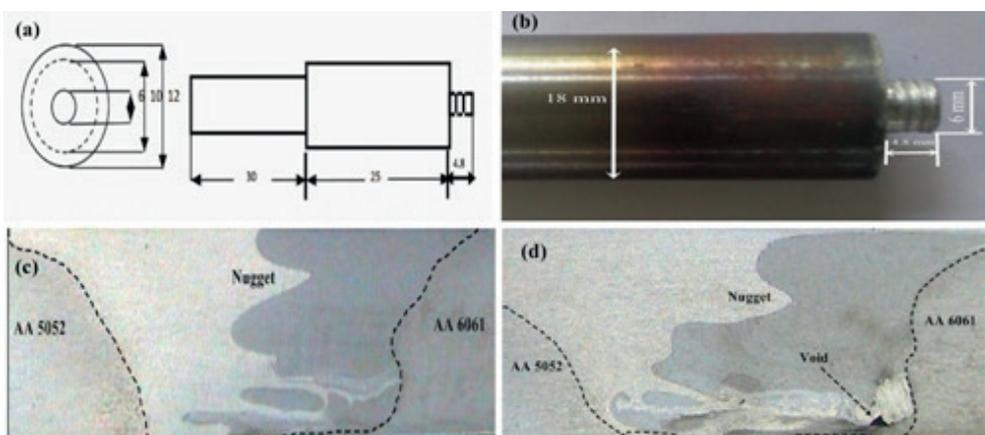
Dimensions of cylindrical threaded tool pin and cross sectional macrostructures of welded samples.
